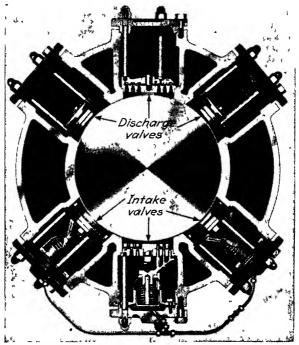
Inlet-valve unloading with diaphragm-operated valve lifters. (Courtesy of Chicago Pneumatic Tool Co)
